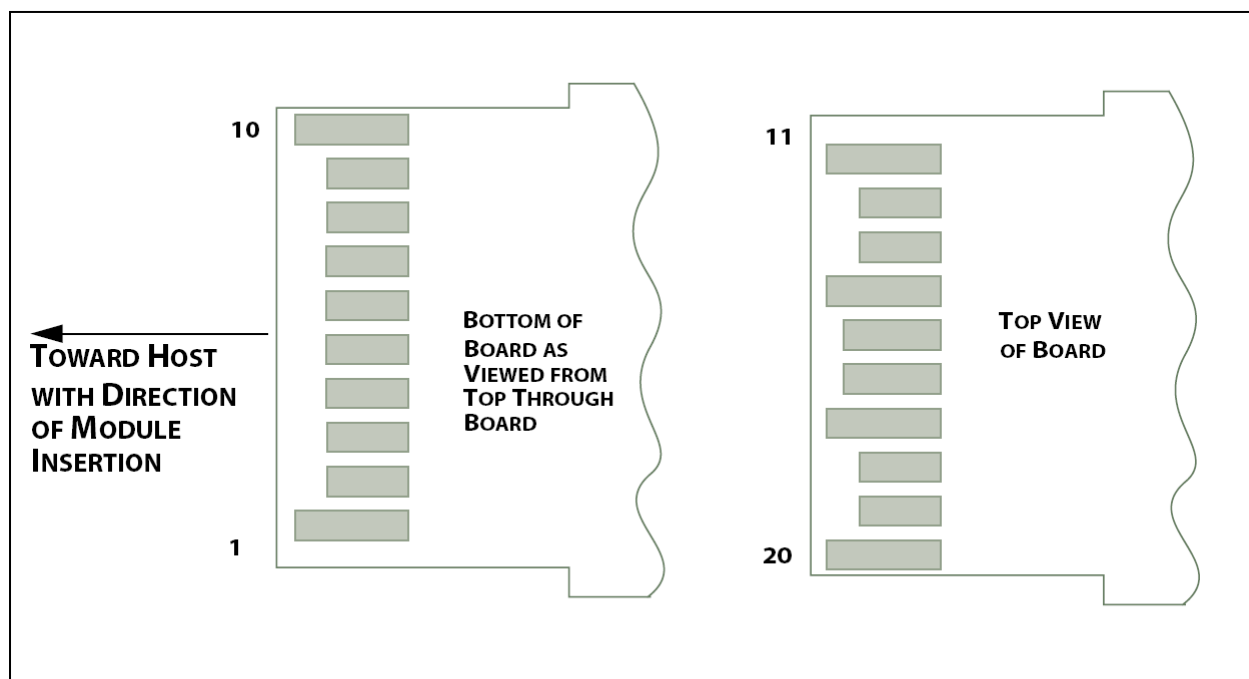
SFP+ MODULE CONTACT ASSIGNMENT
